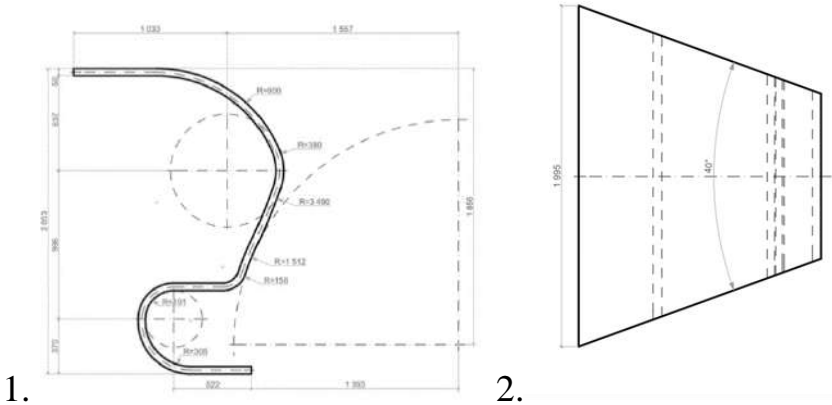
The second stage of object design (1 – main view; 2 – plan)
